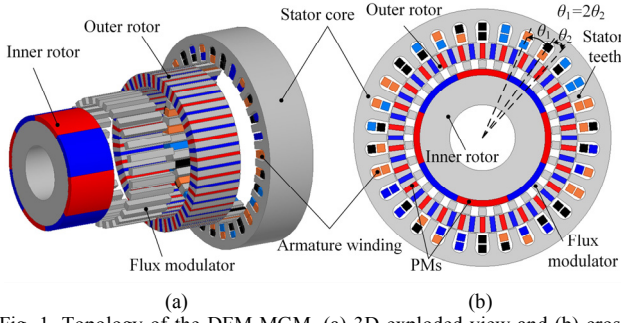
Topology of the DFM-MGM. (a) 3D exploded view and (b) cross-section view.
